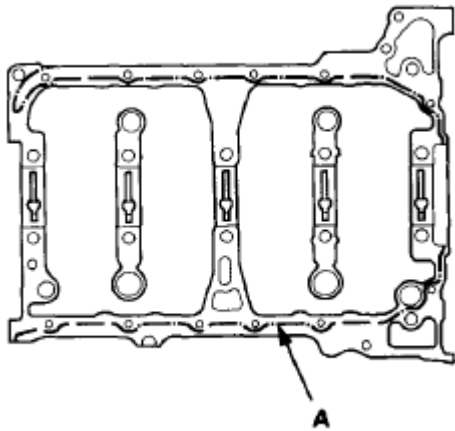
Identifying Engine Block Mating Surface Sealant Area
